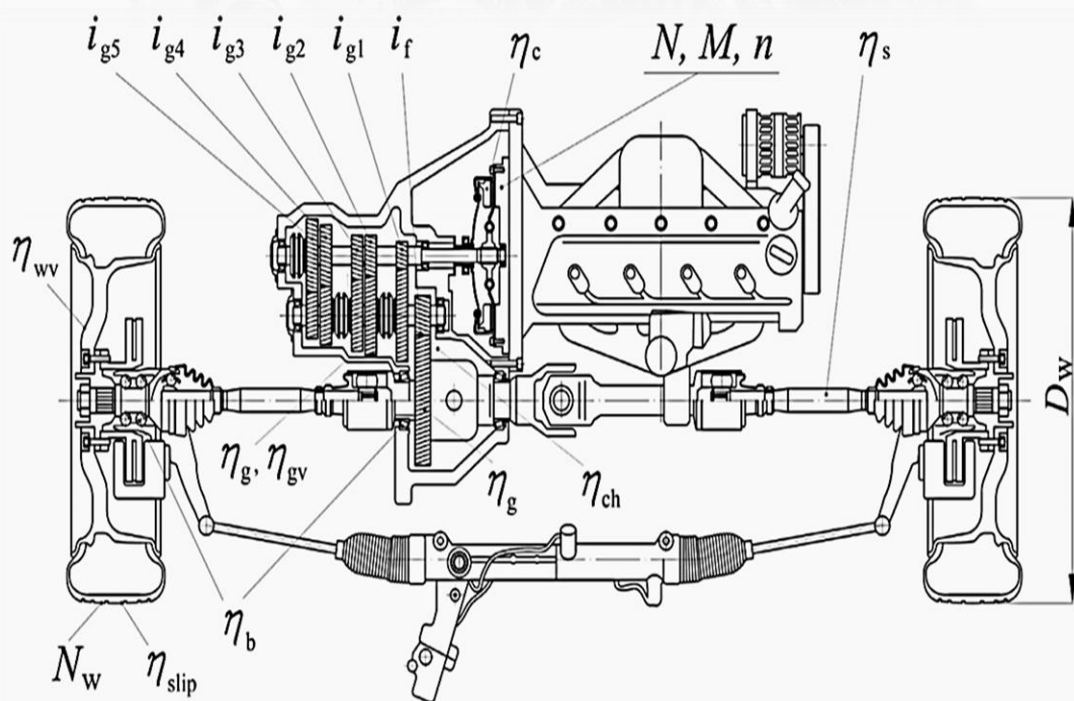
Section of a 5-speed front-wheel drive and transverse-mounted transmission.
